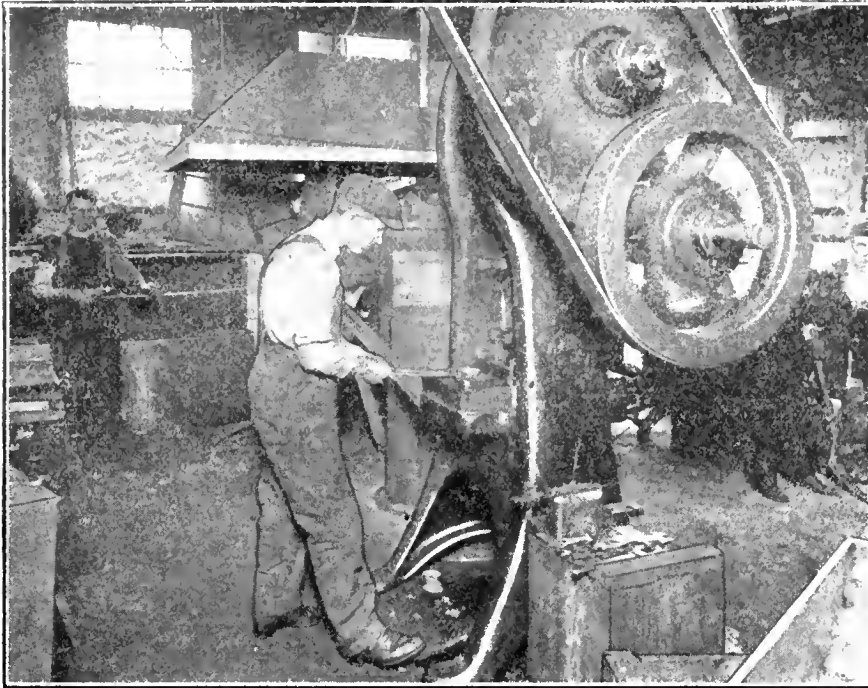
POWER PRESS FORGING SLUGS INTO FUSE SOCKETS AND PLUGS.
